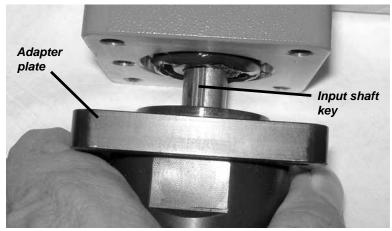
Align the key on the input shaft with the slot in the pinion gear.
